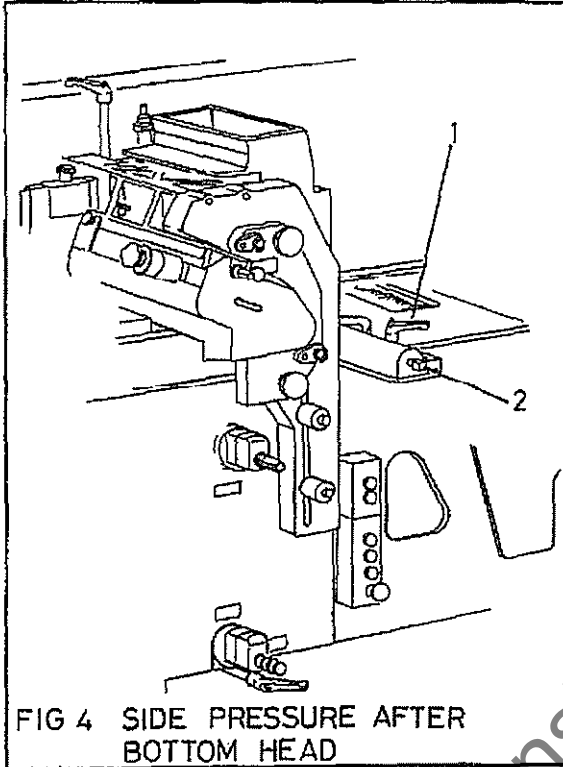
SIDE PRESSURE AFTER BOTTOM HEAD
